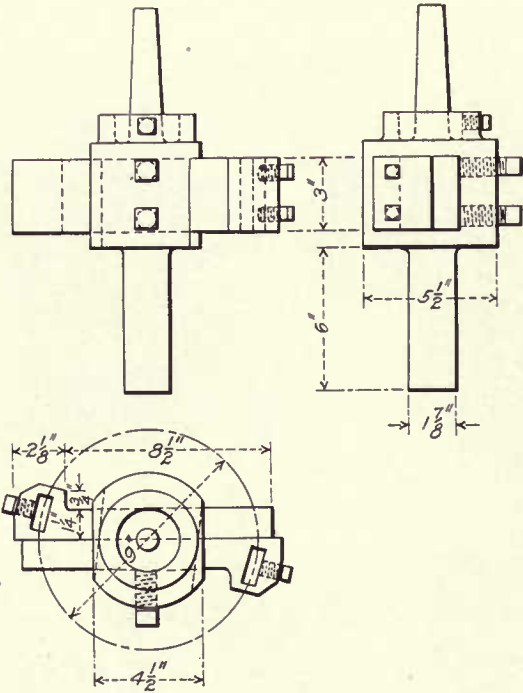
Adjustable Cutter Head for Drilling or Boring.
